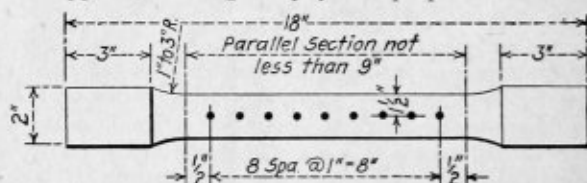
Standard Specimen for Tensile Test of Plate Material
